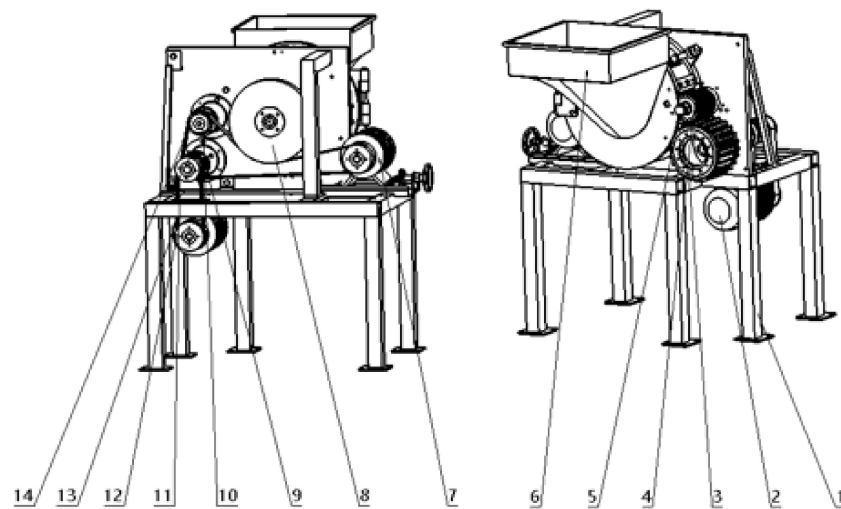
Diagram of the whole machine design. 1. Frame; 2. motor 2; 3. cross-cutting tool assembly; 4. disc tool assembly; 5. slicing outlet; 6. propeller shell and valve assembly; 7. motor 1; 8. propeller drive assembly; 9. tension wheel; 10. disc tool drive assembly; 11. cross-cutting drive assembly; 12. motor 2 output wheels; 13. L-type double-sided toothed synchronous belt 1; 14. L-type double-sided toothed synchronous belt 2.
